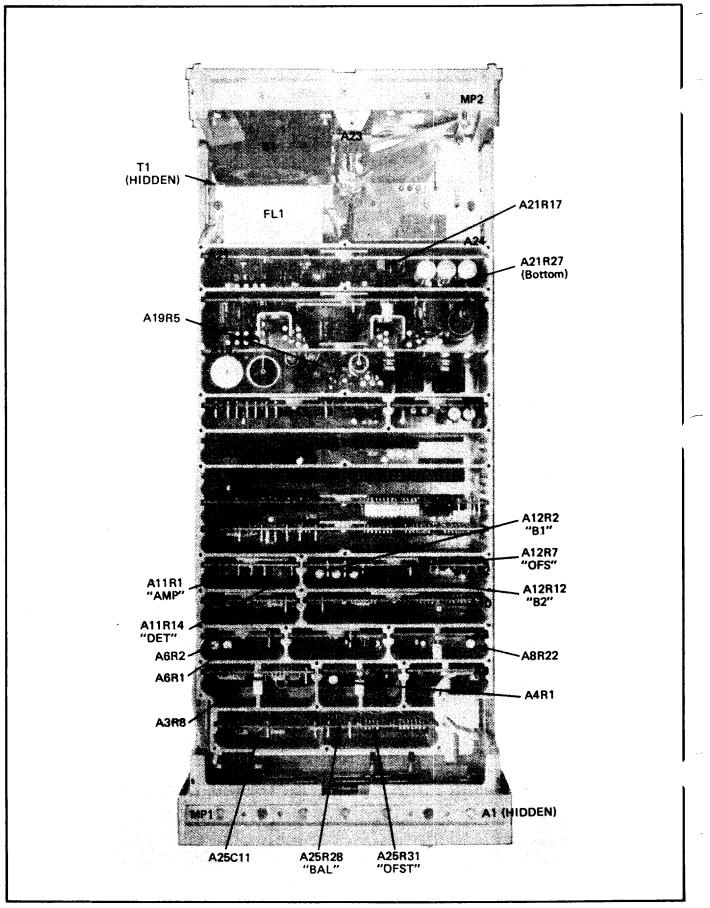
5342A Top View (Assembly Locations and Adjustments)
